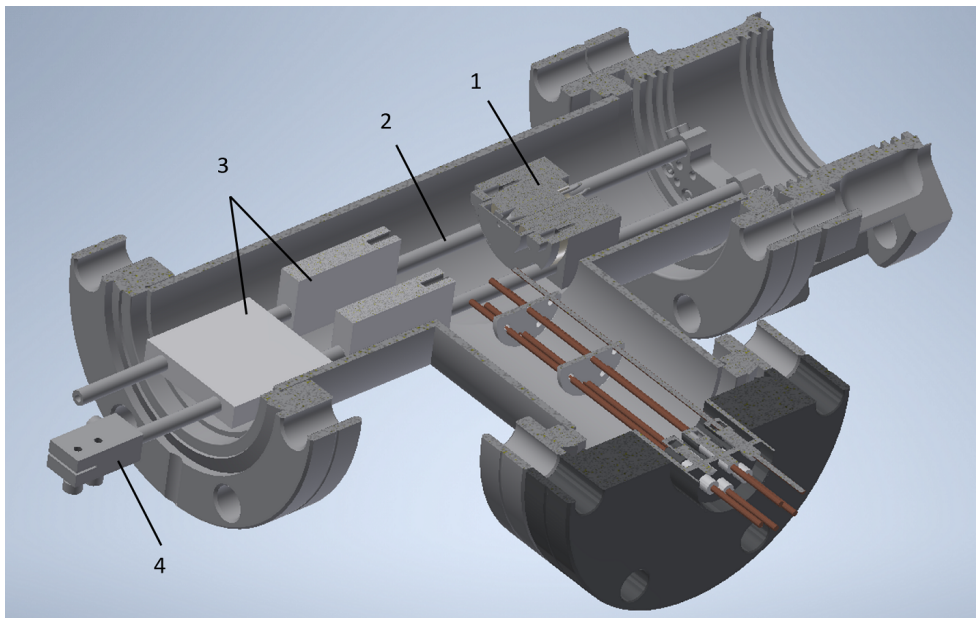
CAD of 1) the e-gun, 2) alumina rod, 3) deflection plates, and 4) dispenser mount assembly in half view.
